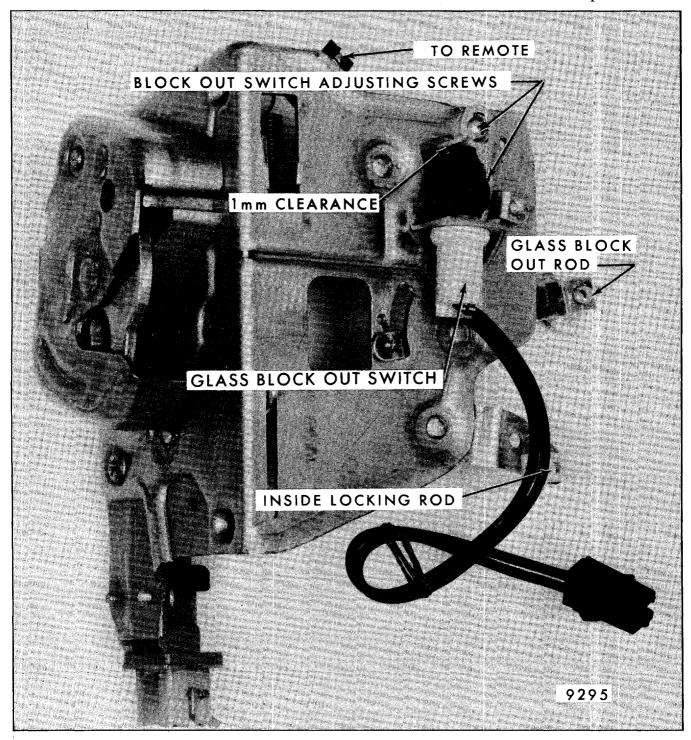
Tailgate Upper Right-Hand Lock Assembly
